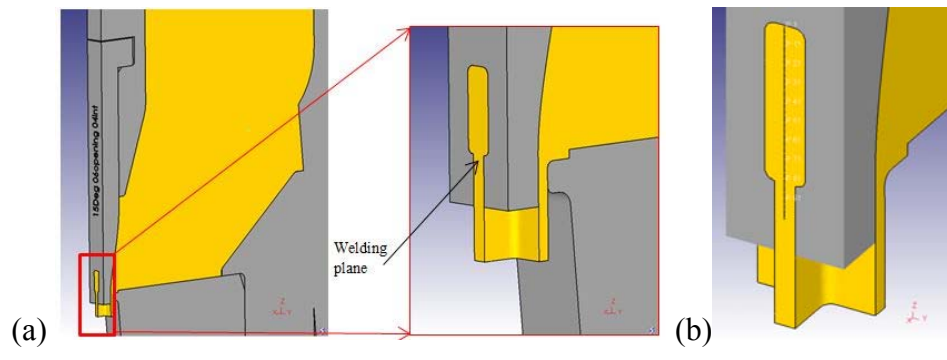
Mandrel DOE; (a) cross sectional model and (b) 100 sampling points on welding plane of port opening
